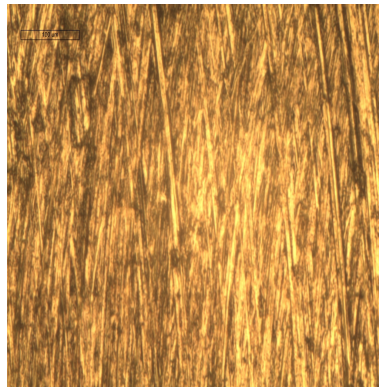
Cutting surface of workpiece by optical micrographs(feed rate 200 mm/min, spindle speed 3000 rpm, cutting depth 0.3 mm and flat endmail)
